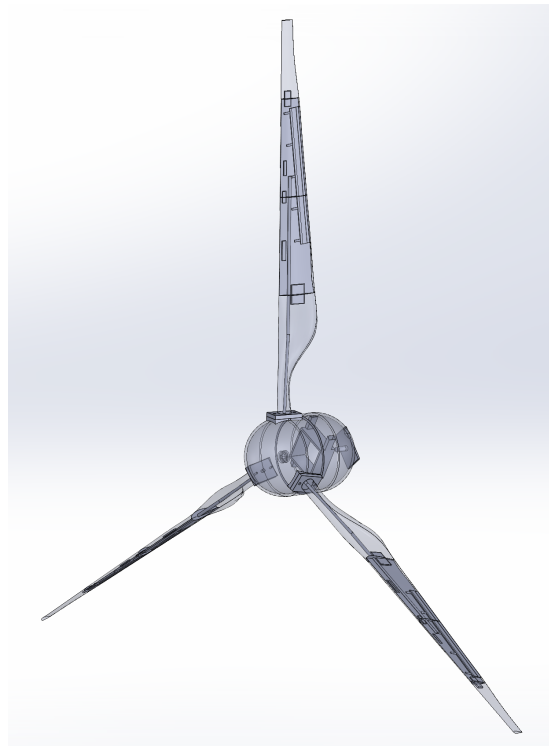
Final Solidworks Model of Wind Turbine Assembly
